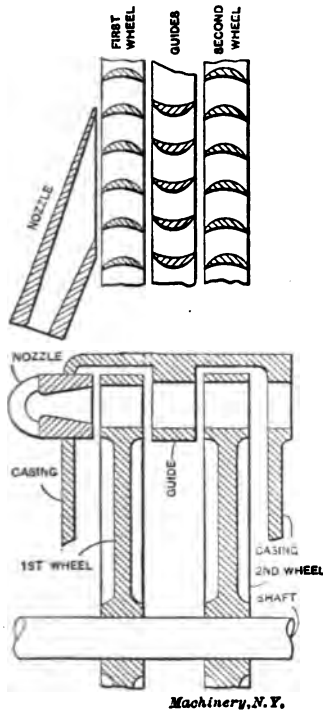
Section through Wheels and Casing of a Compound Impulse Turbine
